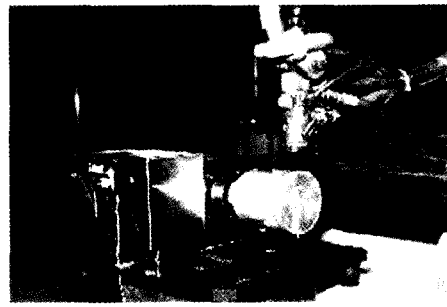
Photograph showing the plasma arc transferred welding equipment used in this study.
